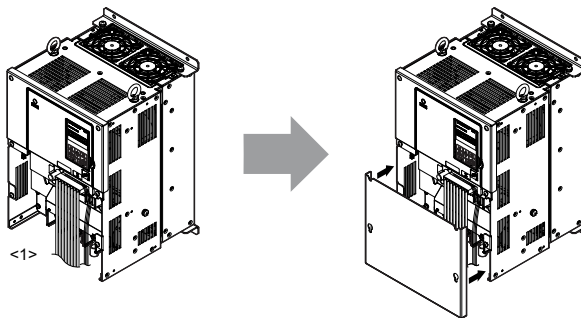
Reattaching the Terminal Cover on an IP00/Open Type Enclosure Drive
